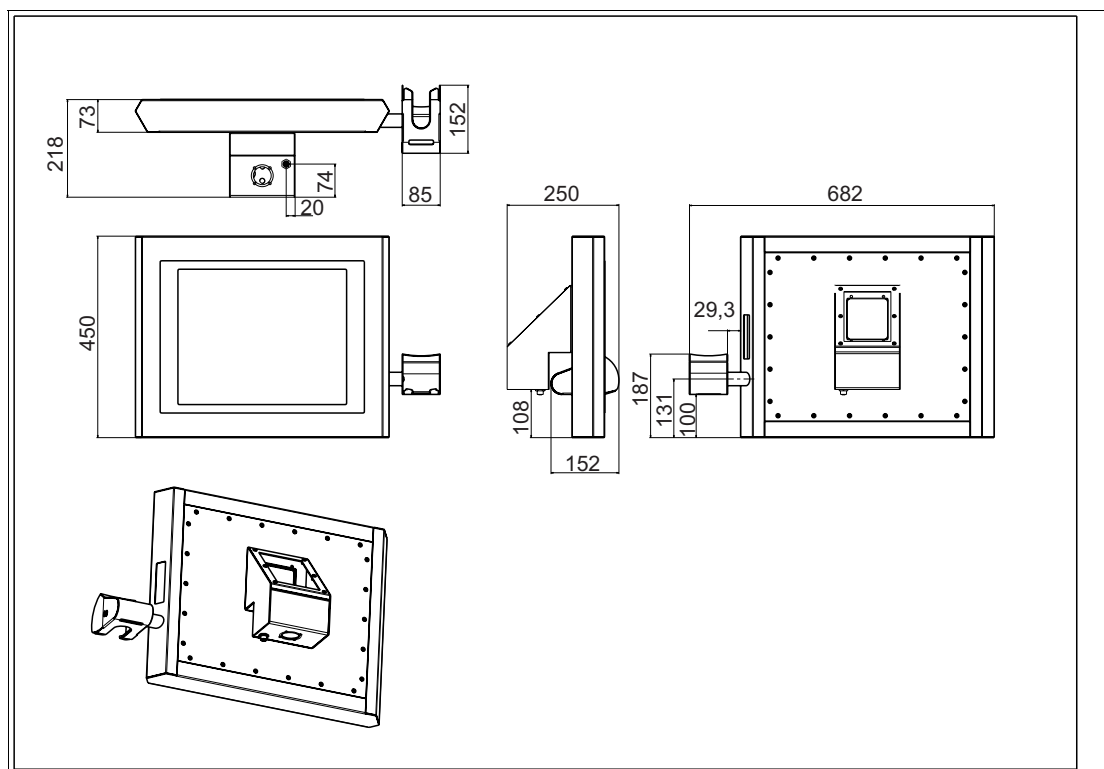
Dimensions VisuNet EX2 GMP RM/PC 3719
